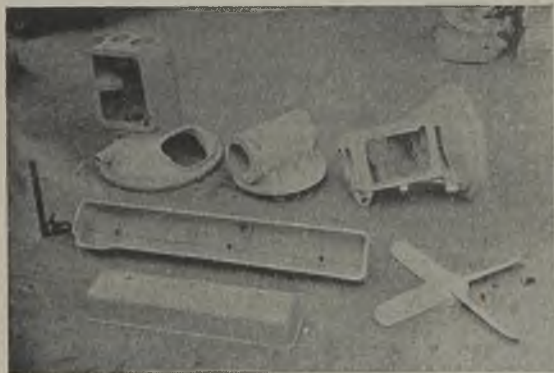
REPRESENTATIVE GROUP OF GRAVITY DIE-CASTINGS FOR HEAVY VEHICLE ENGINE.
